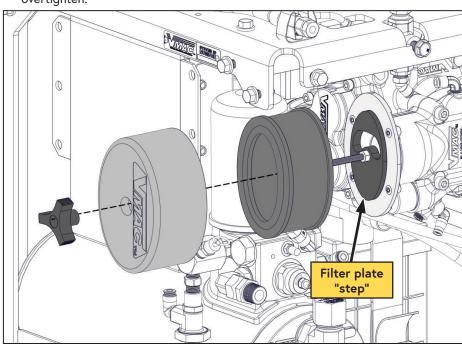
Compressor air filter and cover (PTFE lines removed for clarity)
